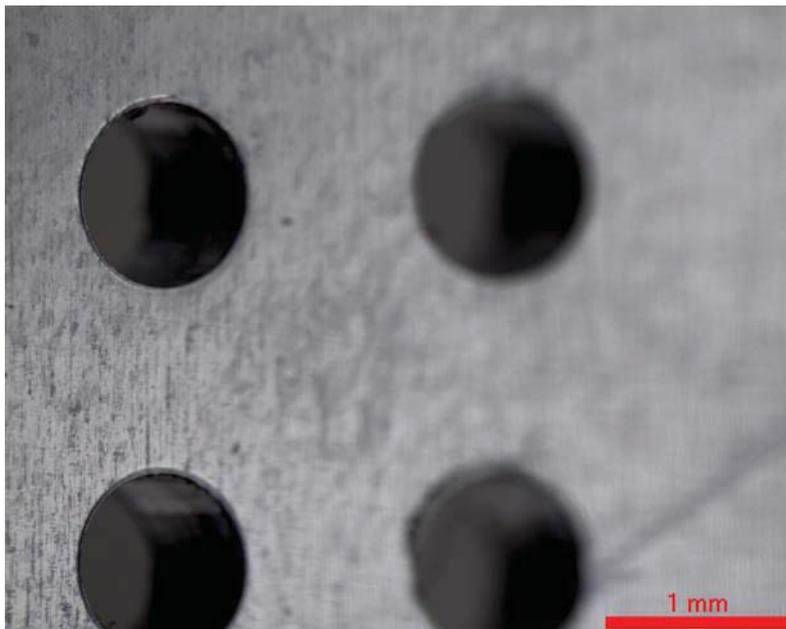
Photograph of hole exit burrs, Drill D, 1st setting ($v_c = 226 \text{ m} \cdot \text{min}^{-1}$, $f = 0.190 \text{ mm}$).
